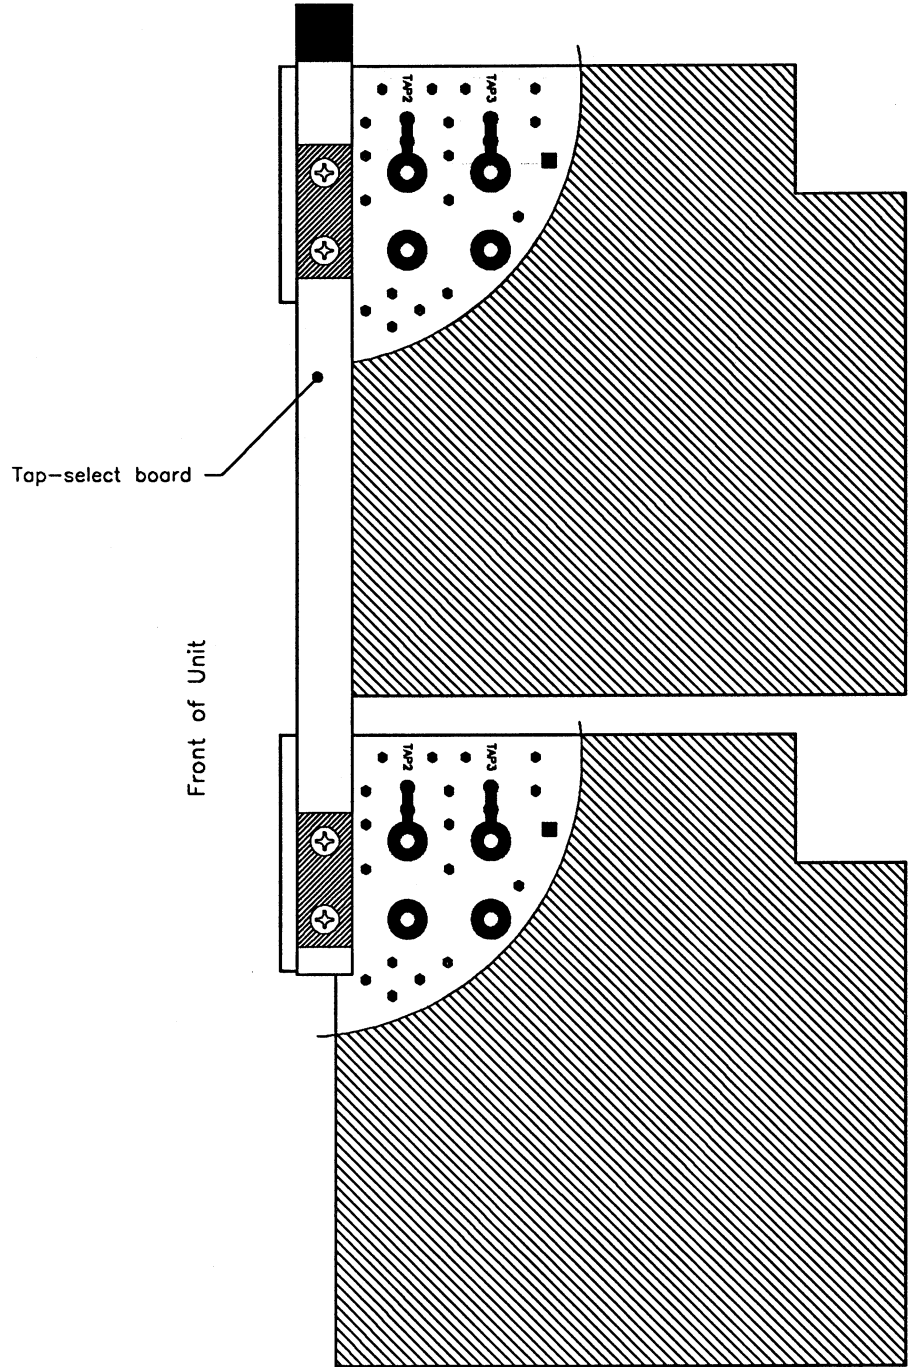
Tap-select board placed correctly to select tap 1 for an MDX with two power modules (the board will be shorter in units with only one power module).
